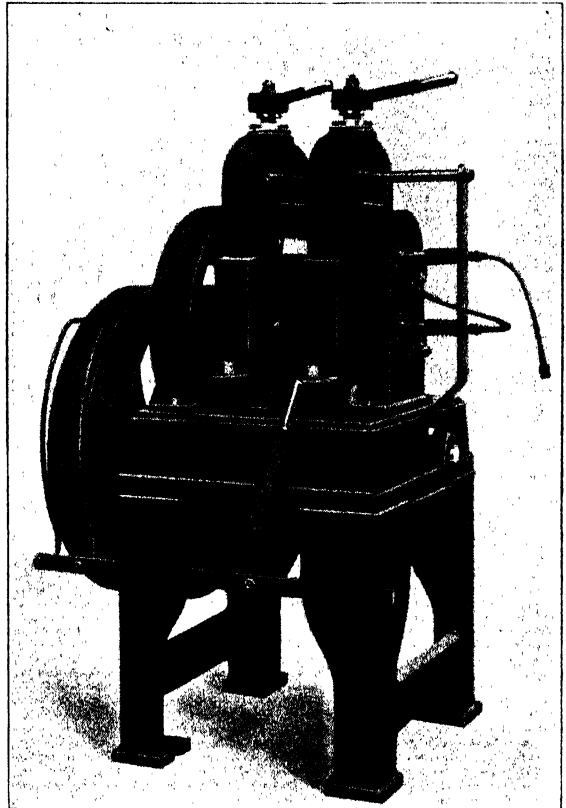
MILL WITH SEPARATE ADJUSTMENT FOR BEARINGS.
